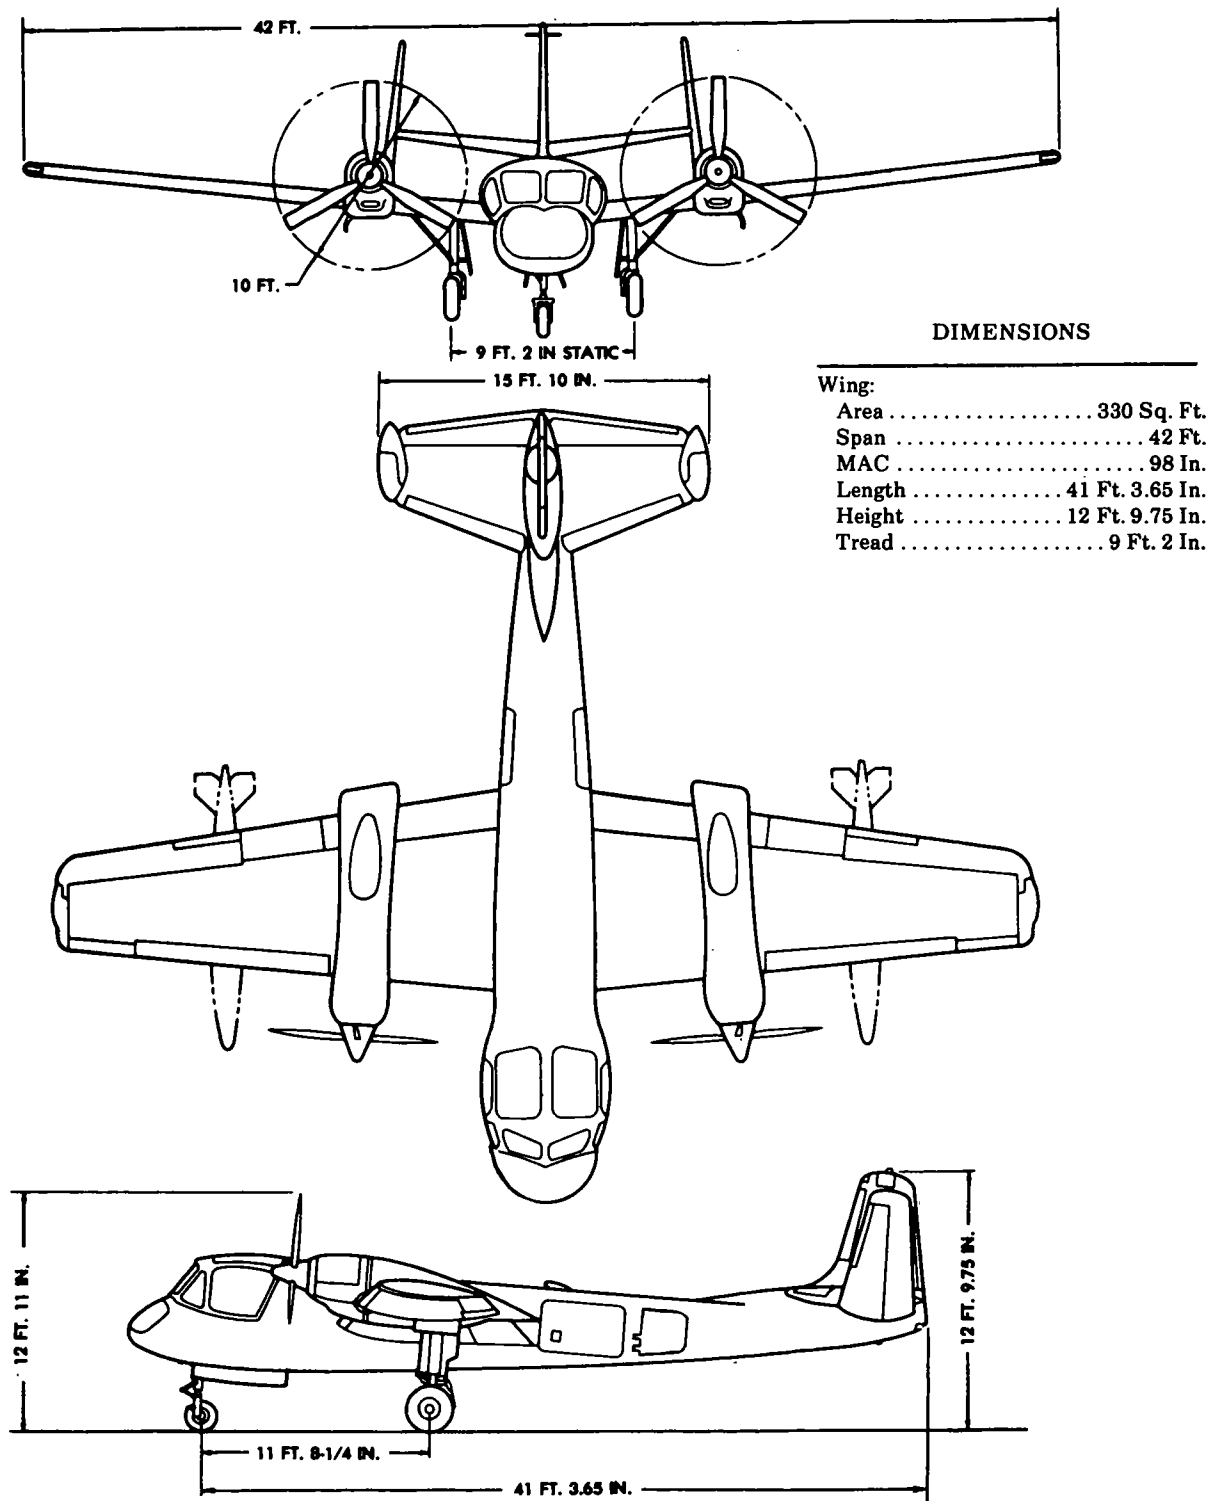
Principal Dimensions, OV-1C (Mohawk)
